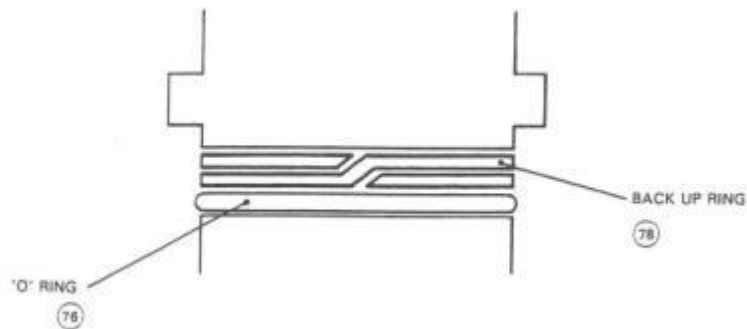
Inlet Valve Seat – Back Up Ring and 'O' Ring Fitting
